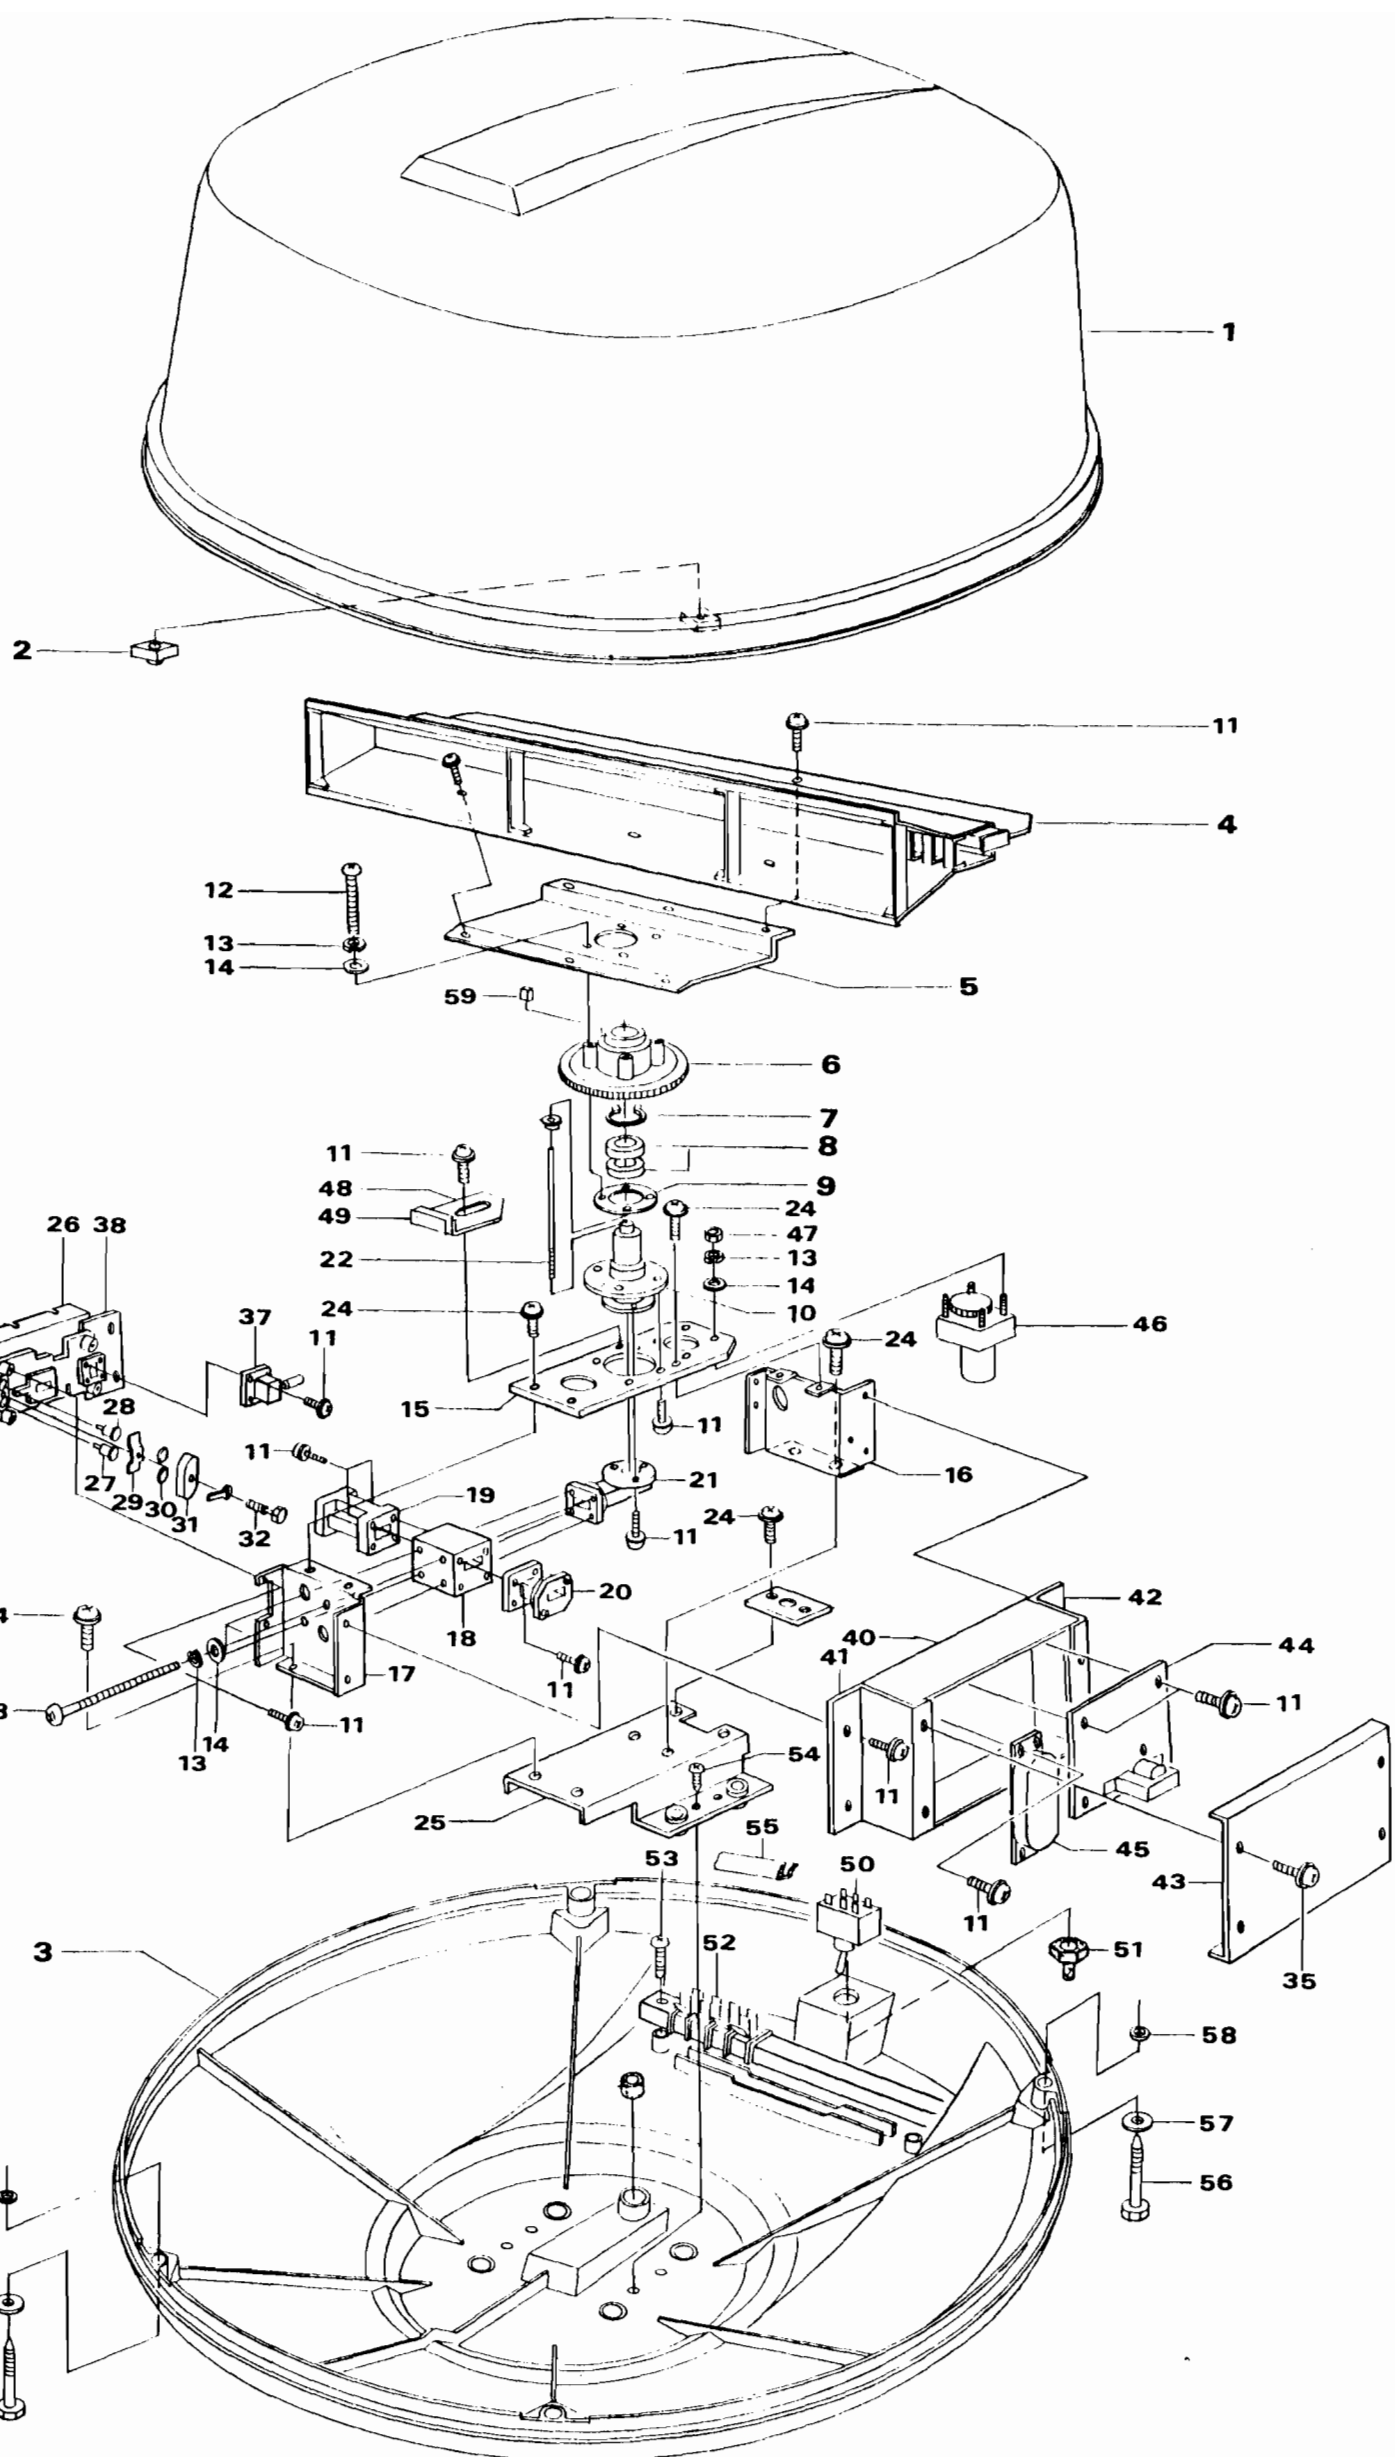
ASSEMBLY DRAWING OF M89362 SCANNER UNIT
